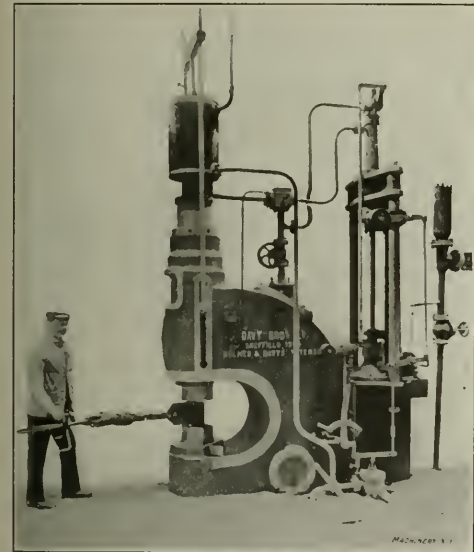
Smaller Size Hydraulic Action Forging Press.
